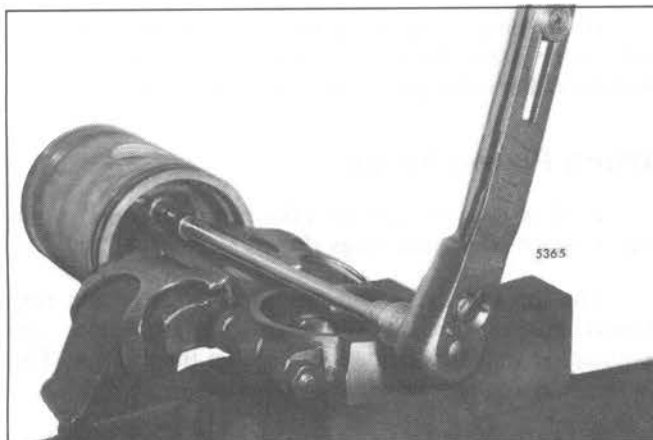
Tightening Connecting Rod to Piston Pin Bolts
